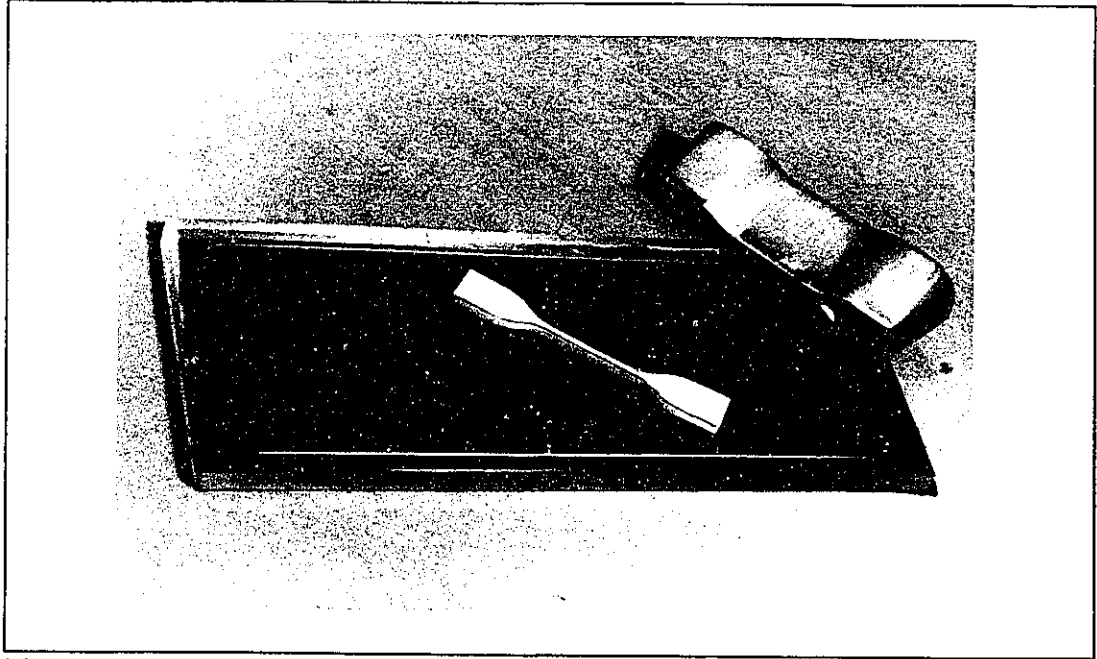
Tensile type TA sealant specimen casting plate, showing typical ASTM D412 die "D" specimen and cutting die.
